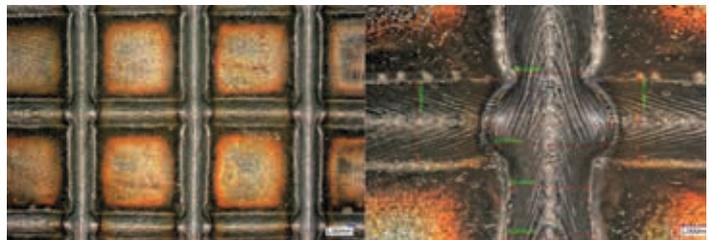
Welding results for the additive manufacturing of a grid on a car body area of 0.7 mm thickness.
